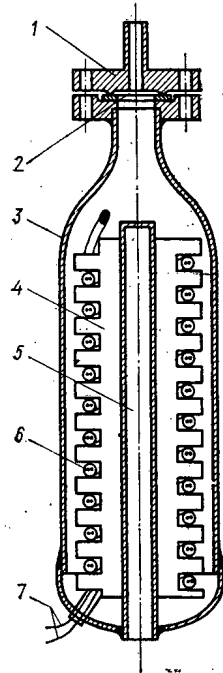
Container with flanged seal. 1) Flange with connecting piece; 2) small copper sealing ring; 3) body of container; 4) impeller; 5) pocket for thermometer; 6) capillary containing heating element; 7) heating element made of constantan wire.
